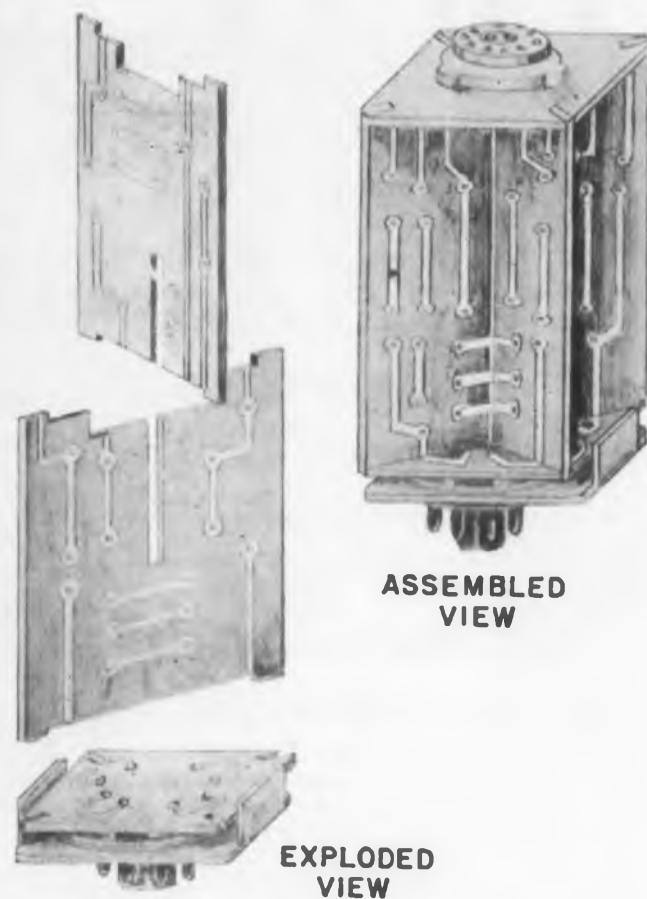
Plus* or cross-shaped printed circuit module is self-supporting and easy to manufacture. Space factor is comparable to flat printed circuit boards using minimum practical spacing.
